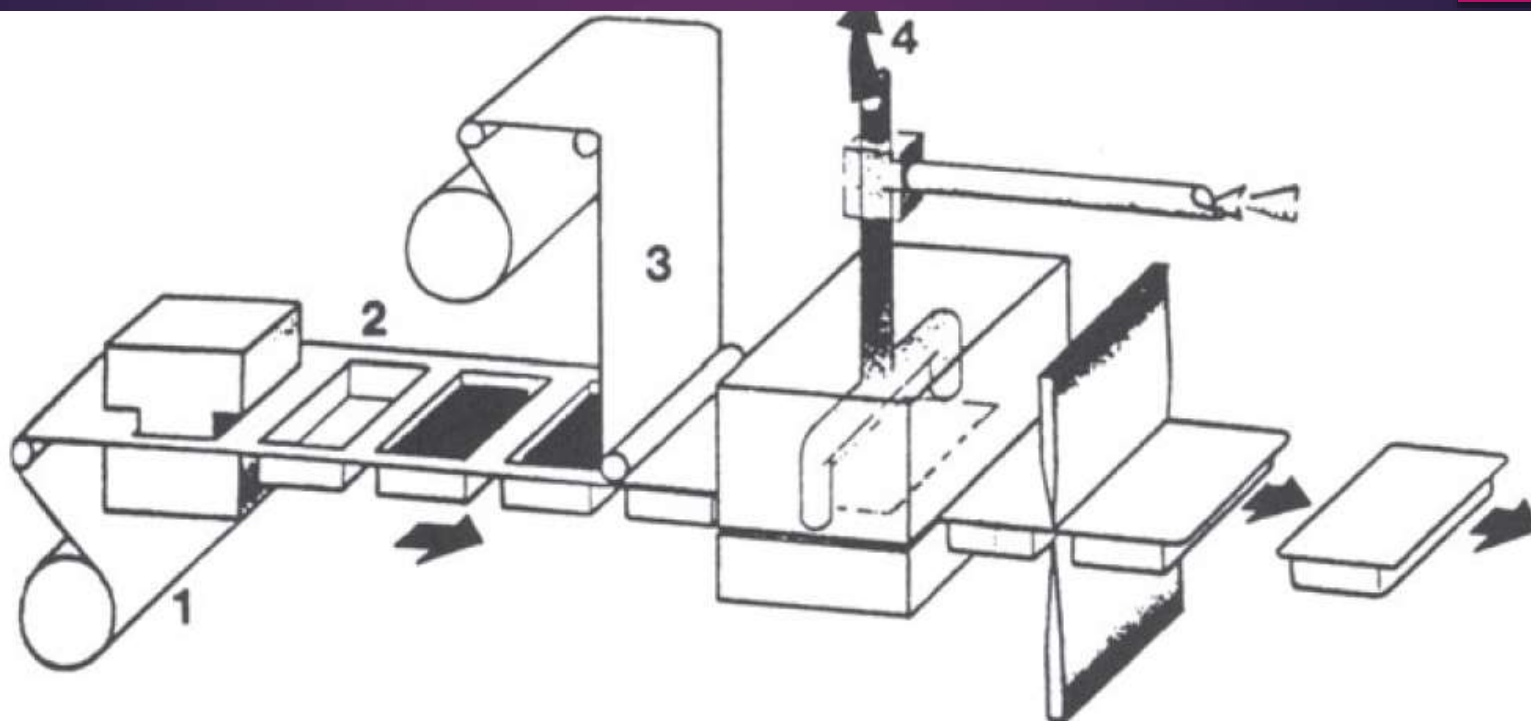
Thermoforming packaging machine fed from two film coils. One inner thermoformable film (1) is formed into a tray (2). The food product is placed in this tray covered by an upper film (3). A vacuum is created in the tray (4), and broken by the gas mixture just before the upper film is sealed.
